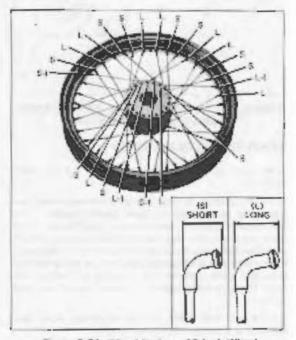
, Wheel Leging - 19 Inch Wheel (1973 and Later)
